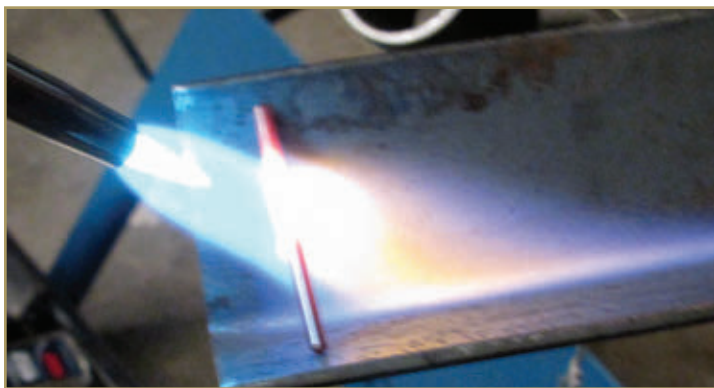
One of the shafts being heated on the improvised hardening rig.
